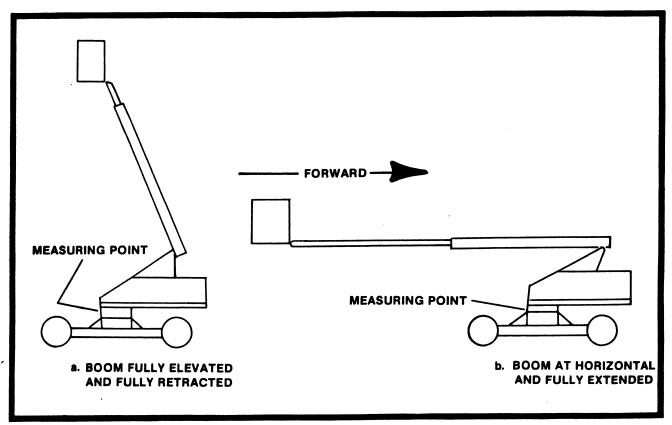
Swing Bearing Tolerance Boom Placement.
